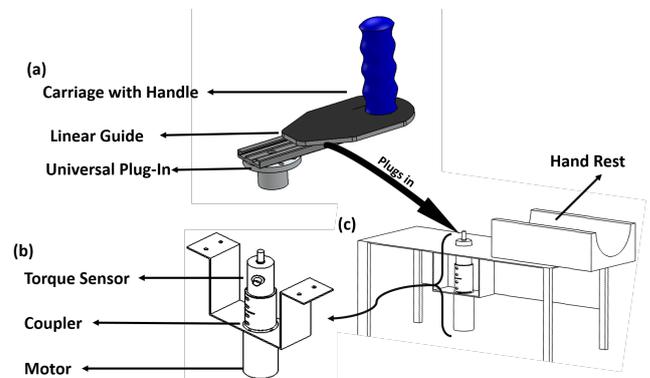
(a) Wrist flexion extension Plug-in. (b) Actuator-torque sensor assembly. (C) Robot Housing.
